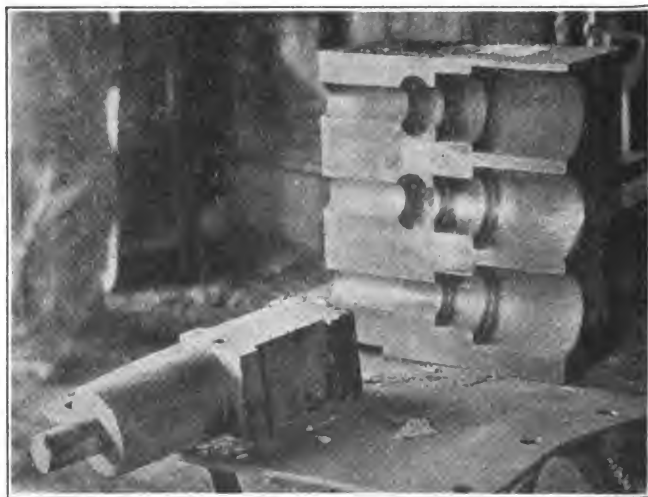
THE FINISHING PUNCH AND HALF OF FORGING DIE FOR FORMING BUSHINGS
